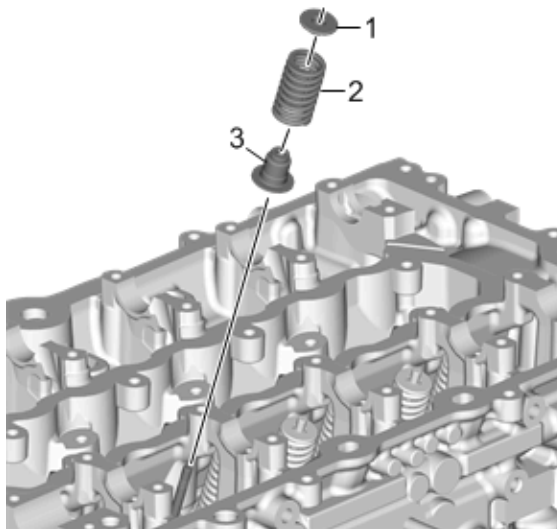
Valve Spring Retainer, Valve Spring And Oil Seal
